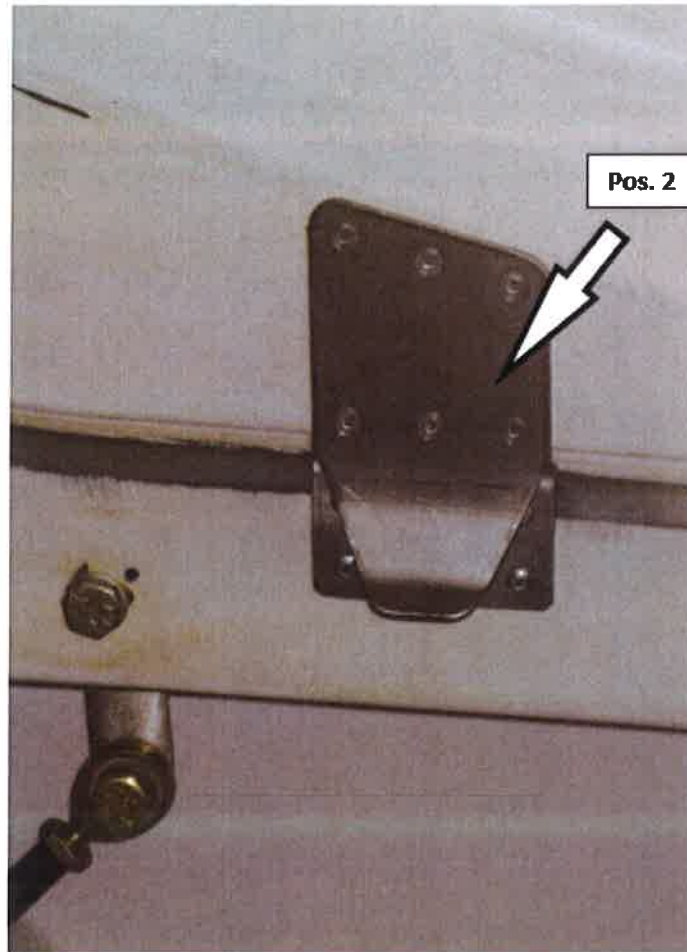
Fixing of the guiding metal plate on the movable frame (view of the left side of the cockpit)
